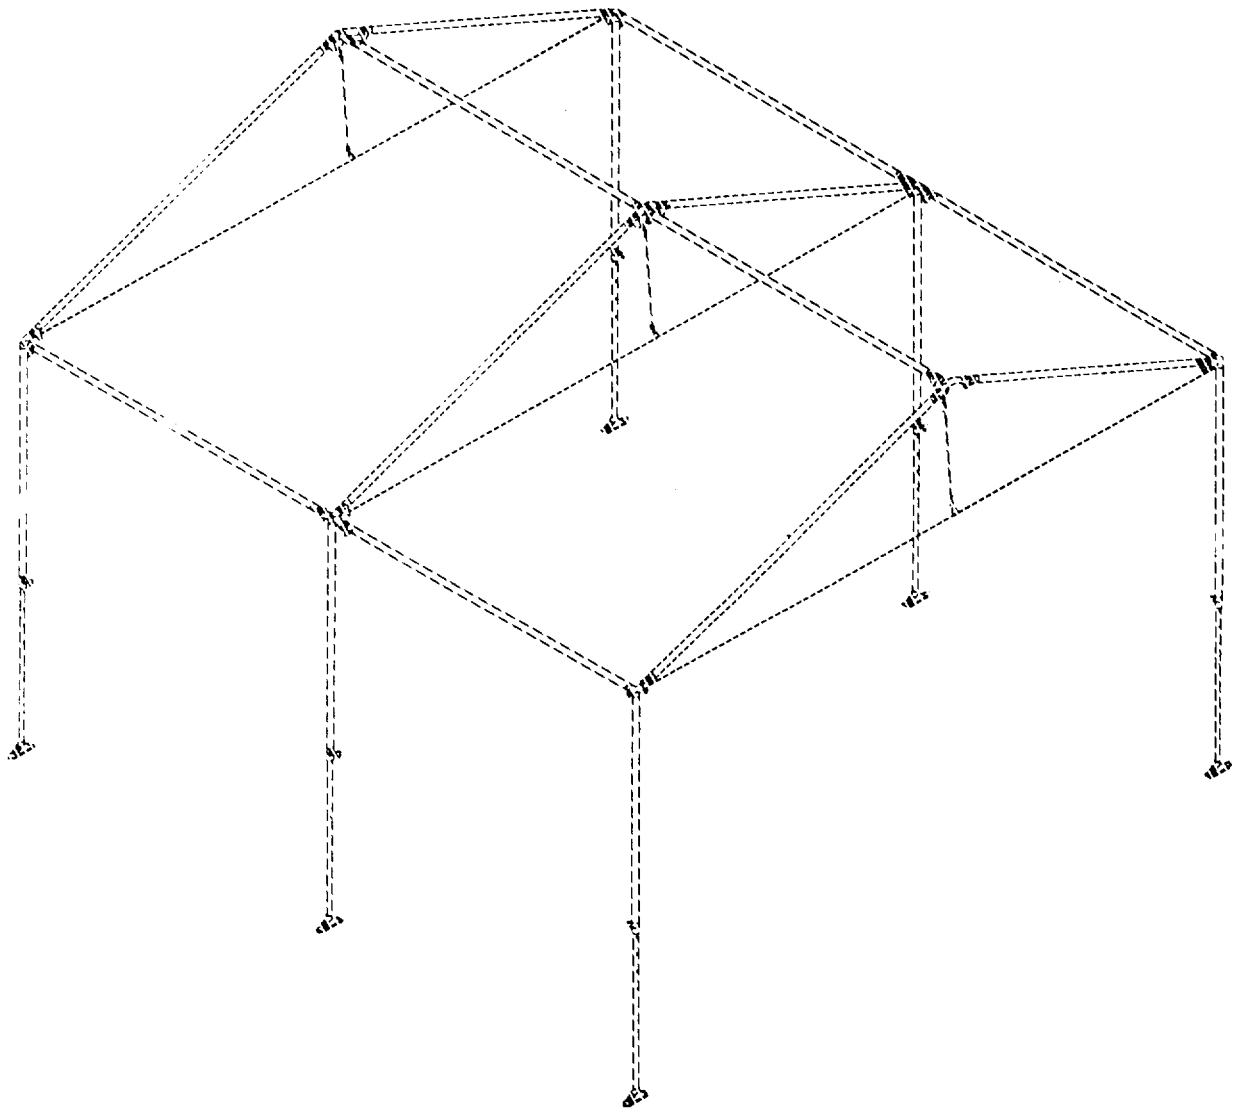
Tent Frame Assembly (Sheet 1 of 3)
